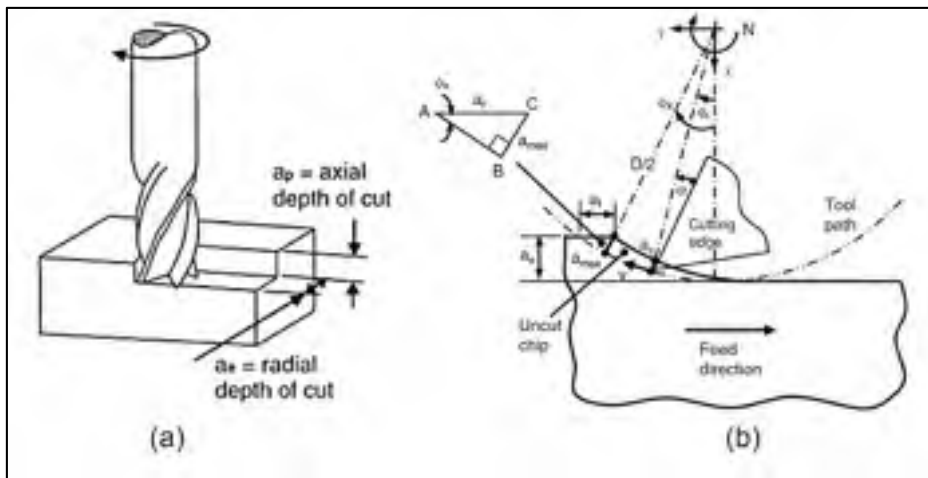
a) face milling, b) milling geometry (Sheikh-Ahmad, 2008)
